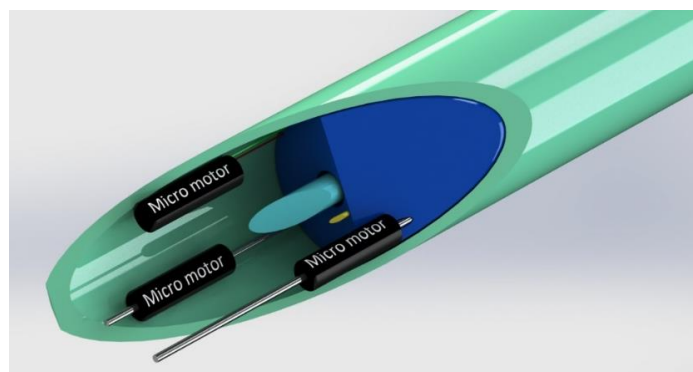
A cross-section view of the catheter, displaying the three micro motors.
